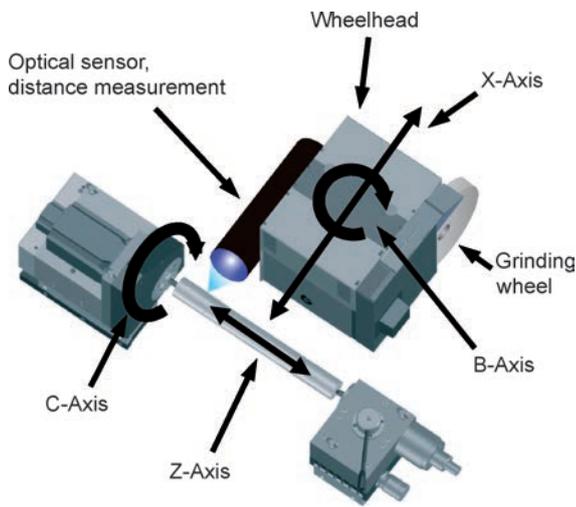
Arrangement of the optical sensor on the wheel head in the grinding machine.
